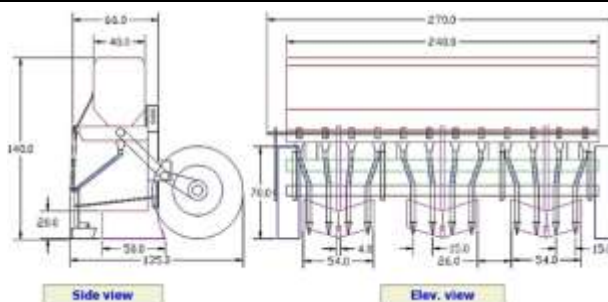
and Photo 2. Side view and Elev. of the modified hill drill
